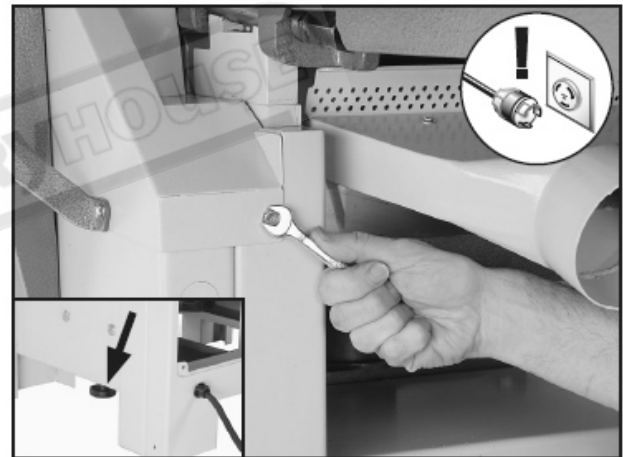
Removing Capscrew on V-belt cover and belt tension knob (inset).
